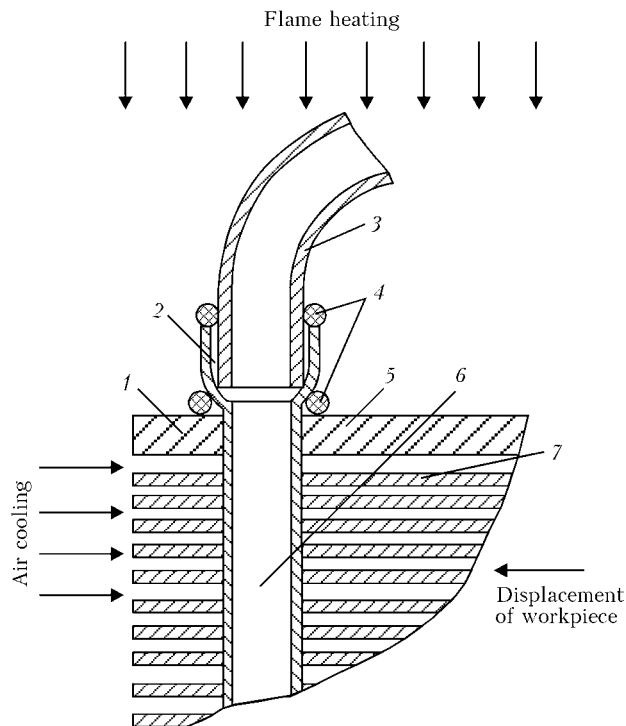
Scheme of heat exchanger sub-assembly being brazed: 1, 2 — points of arrangement of thermocouples; 3 — return bend; 4 — brazing alloy; 5 — tube plate; 6 — finned tube; 7 — plates for fins
